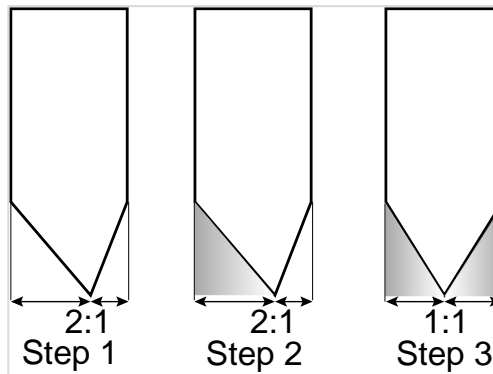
Welding For Fillet Joints  $\geq 19$ mm
